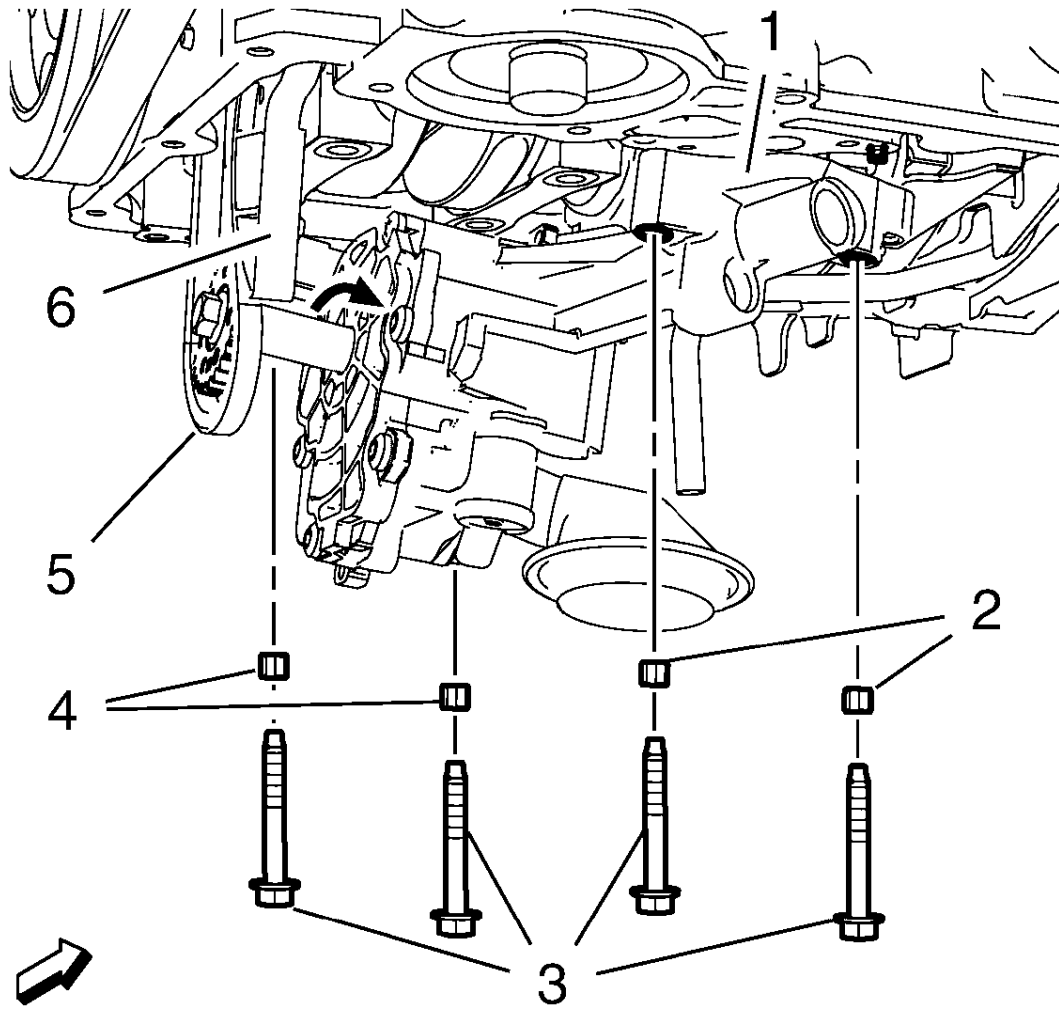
Oil Pump, Bolts, Retainers, Oil Pump Drive Chain And Tensioner
